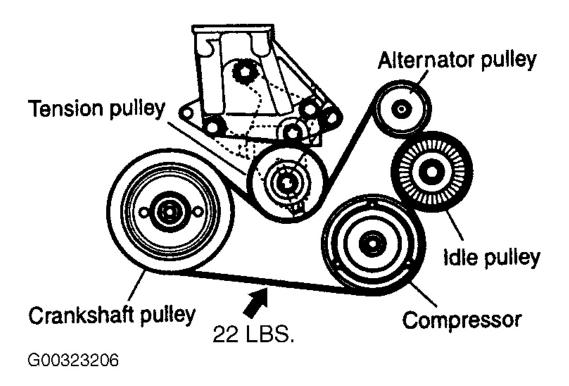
Measuring Alternator & Air Conditioning Compressor Belt Deflection Courtesy of KIA MOTORS AMERICA, INC.
